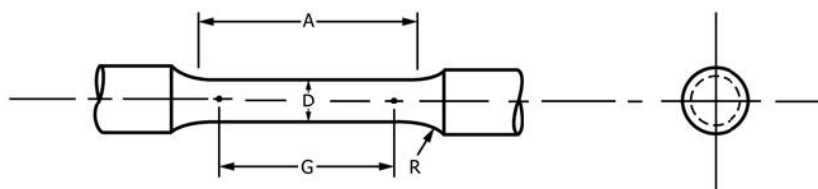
Standard cylindrical tensile specimen [60]
